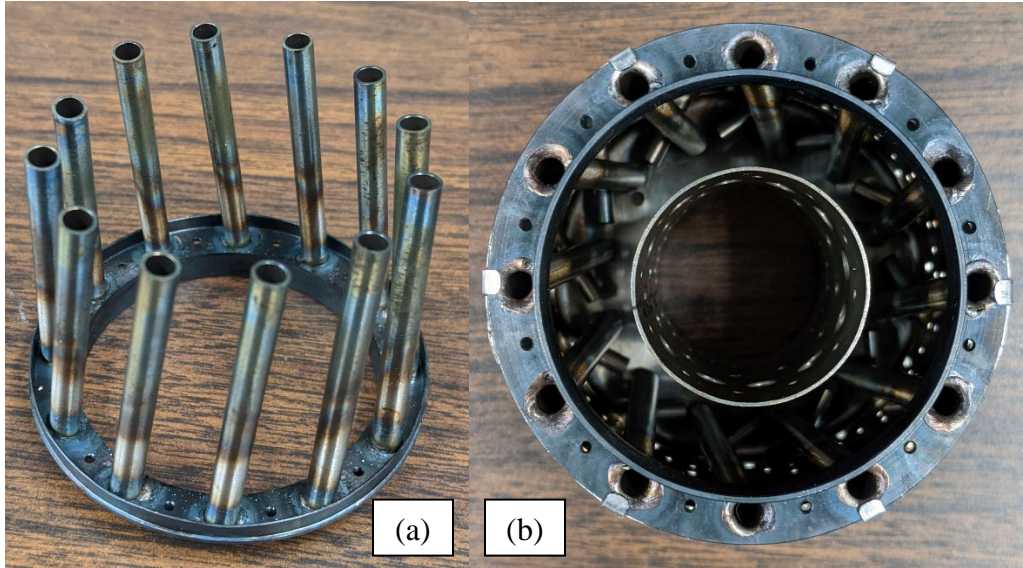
Fuel guide tubes (a). Assembled flame tube and guide tubes (b).
